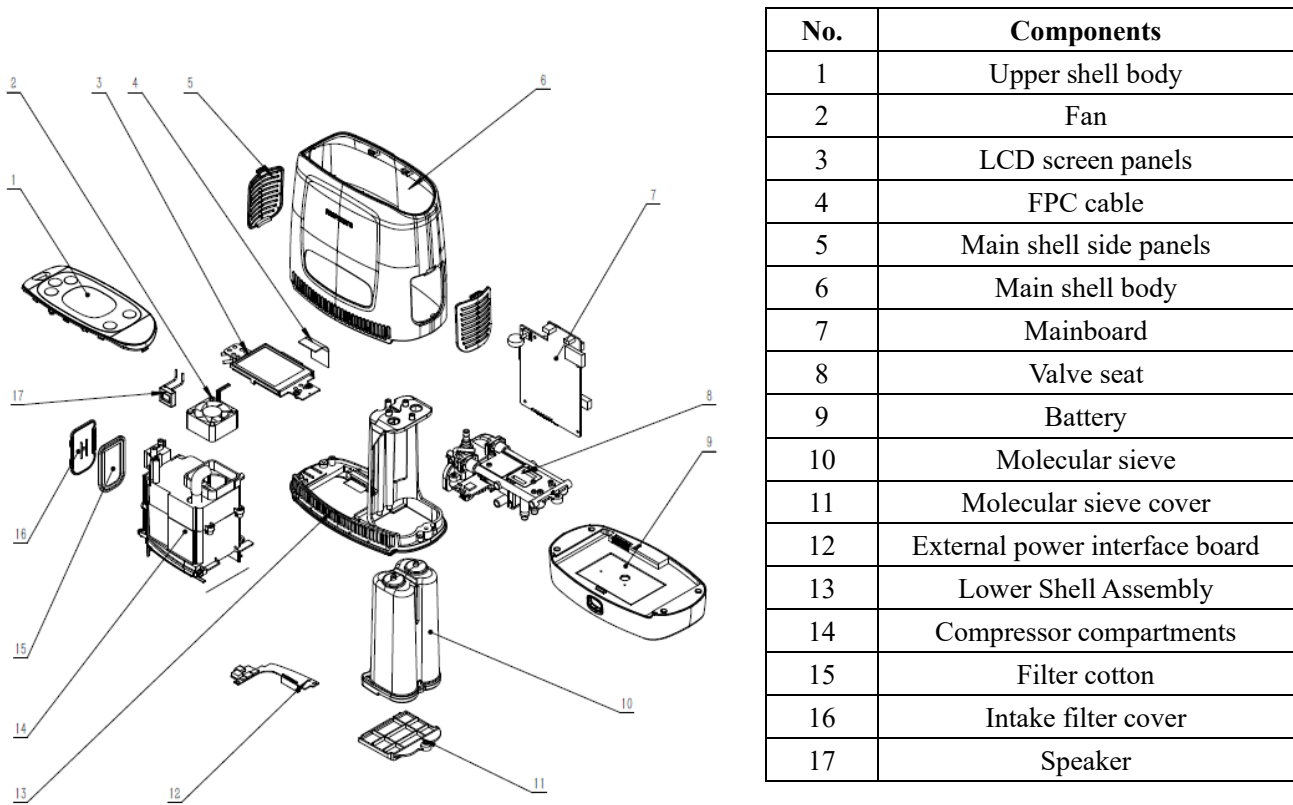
Diagram of Detachable Parts for Portable Medical Oxygen Concentrators
